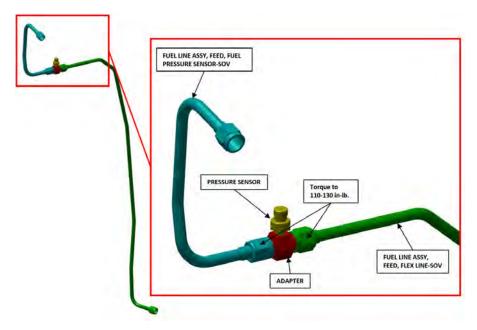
FUEL SUPPLY LINE, SUBASSEMBLY
